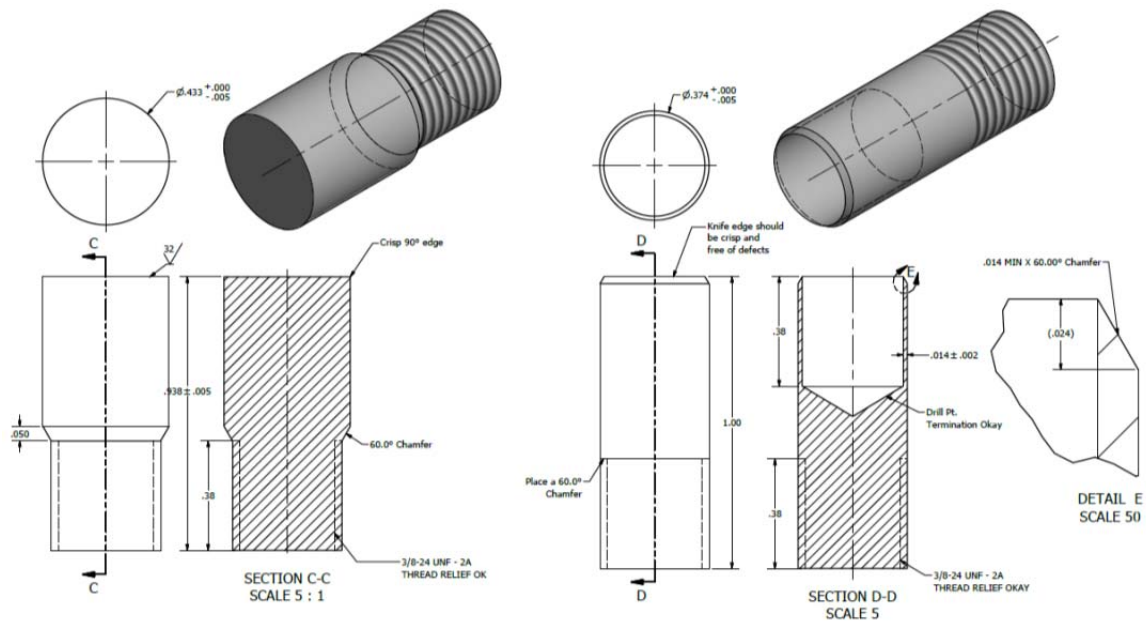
Sample design for PRW for endplug (left) and a thin-wall cladding (right). The threads are for tensile testing of the endplug-cladding weldment.
